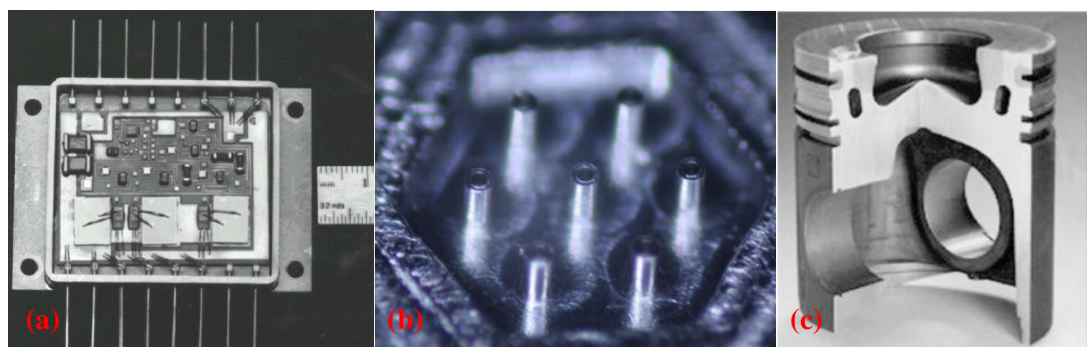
(a) SiC_p/Al electronic package for a remote power controller [21] (b) Micro machined electro spray atomizers [22] (c) Partial short fibre reinforced light metal diesel pistons [23]
